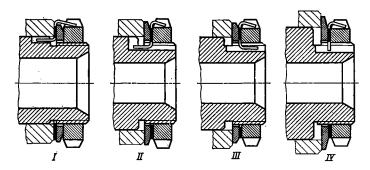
Setting safety washers on stepped shafts using plain bearing washer
